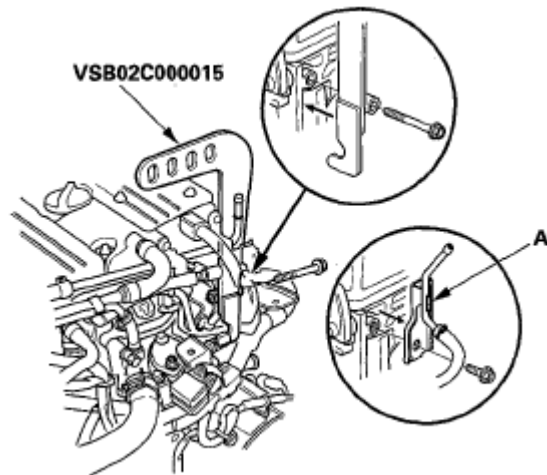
Identifying Purge Joint Pipe And Engine Hanger/Adapter
